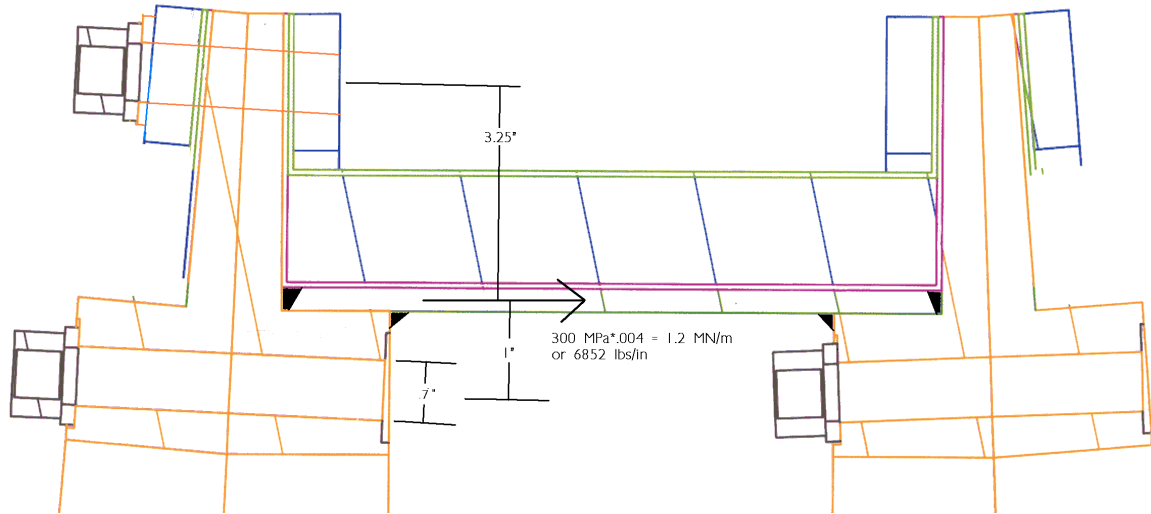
For sizing the bolts, the direct mandrel tension resulting from bending of the TS is assumed to be transmitted directly into the lower flange bolt. For the bolts, this is conservative, The upper flange bolt will contribute some, and will carry the offset moment. This sketch shows the elbow inner radius equatorial plane tensile load.
